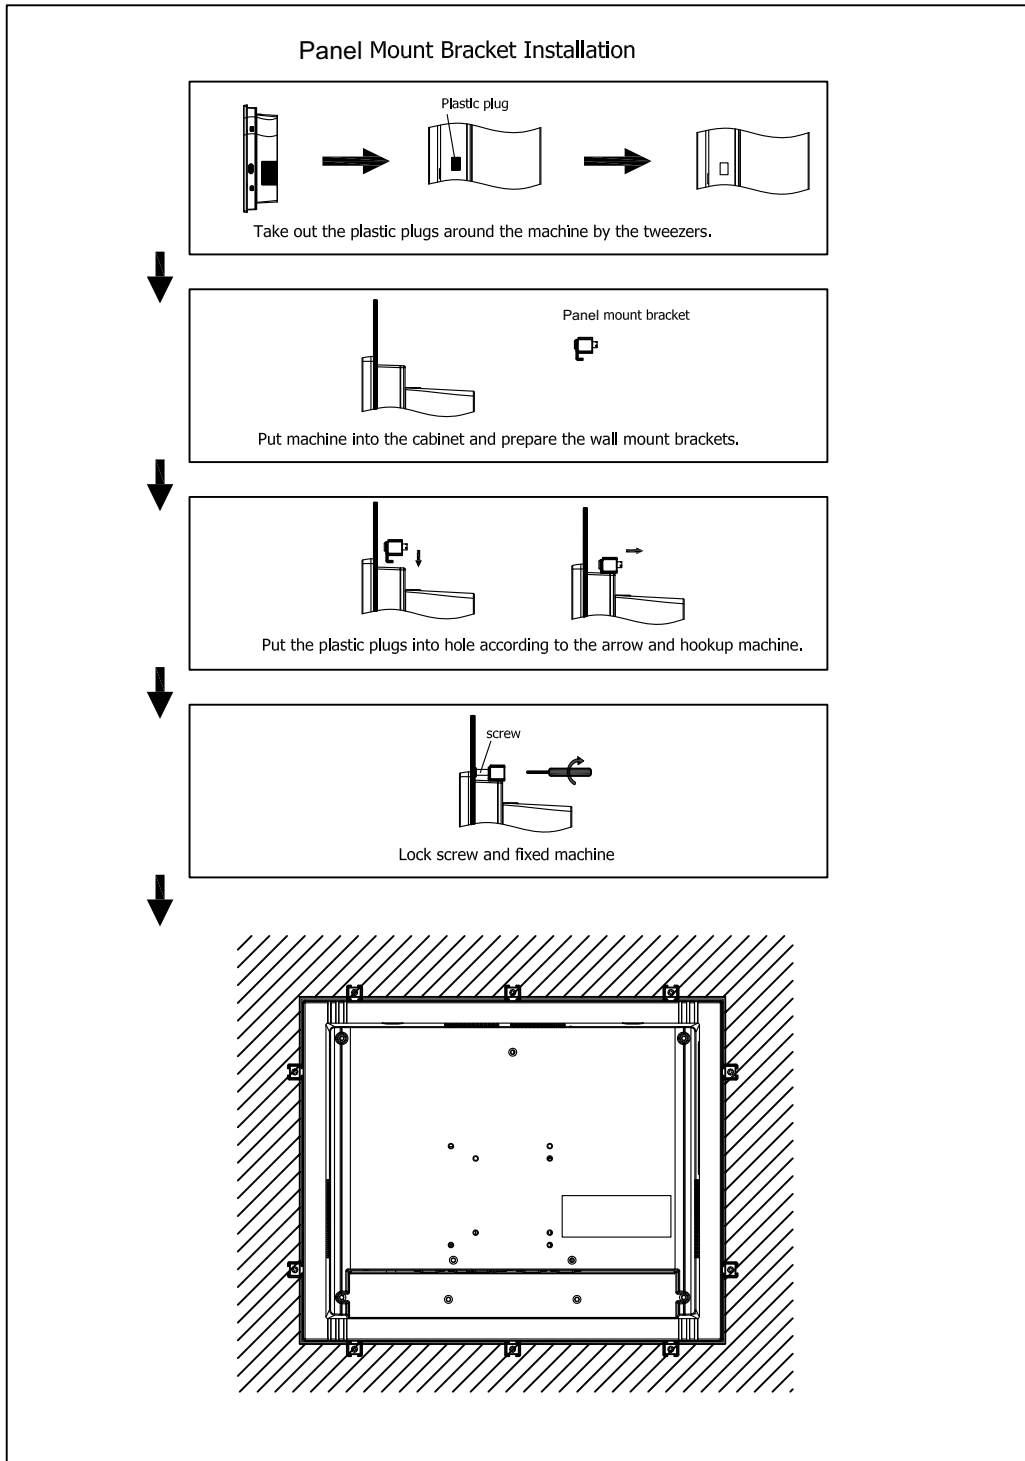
Hook installation method/ 挂钩安装 / 掛鉤安裝
